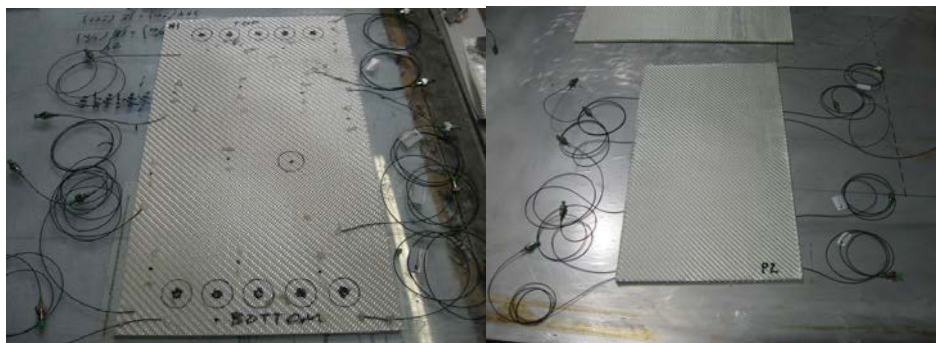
Sensor layout and installation (left) and completed panel ready for cure (right)
